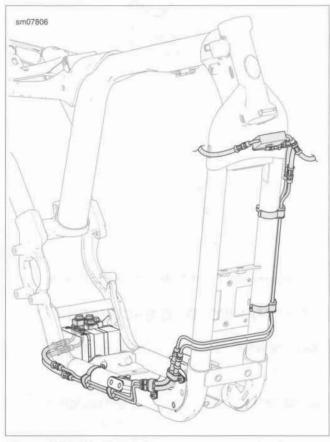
Manifold to EHCU Front Brake Line Routing
